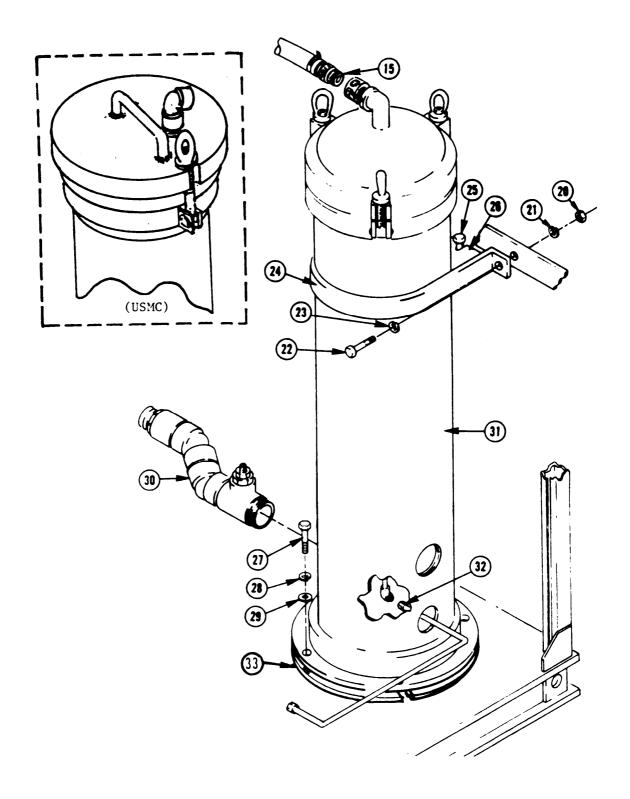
Cartridge Filter Assembly (Typical) (Sheet 2 of 2)
